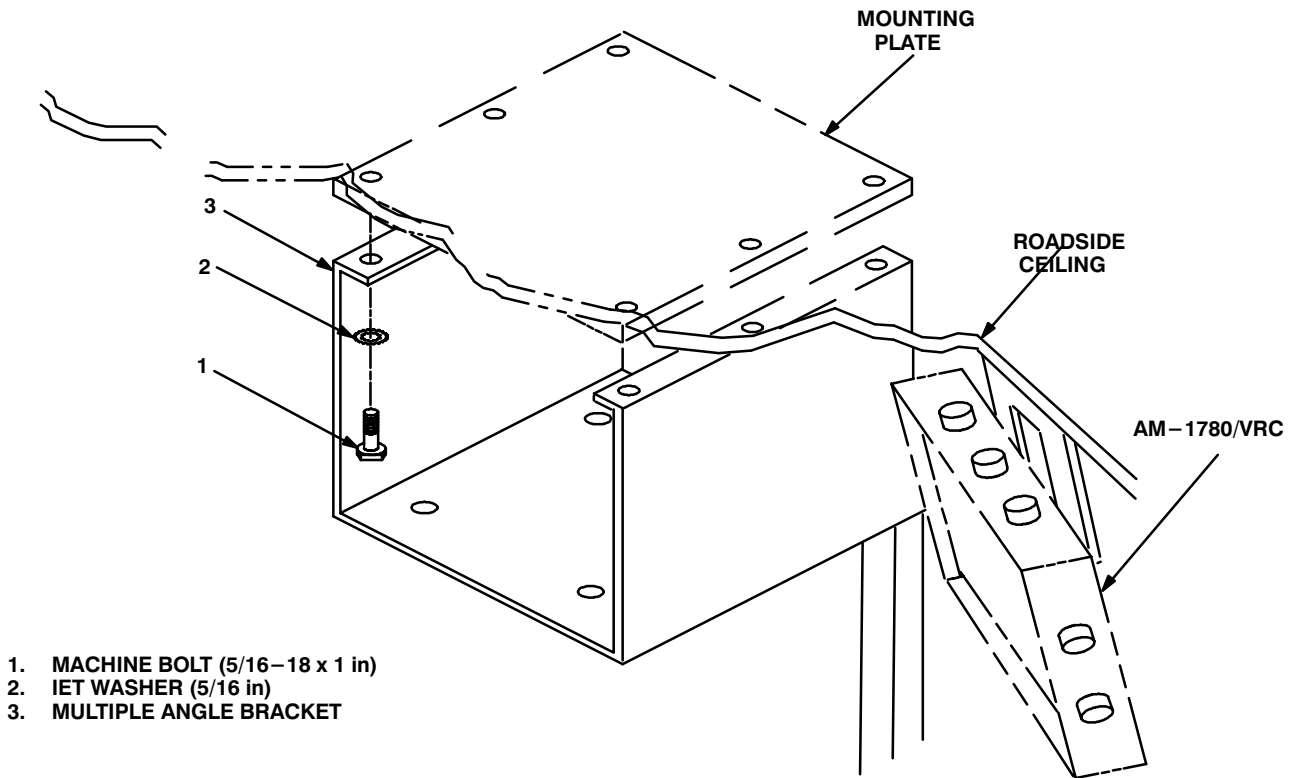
(1). Mounting Base Installation: Installing Multiple Angle Bracket
